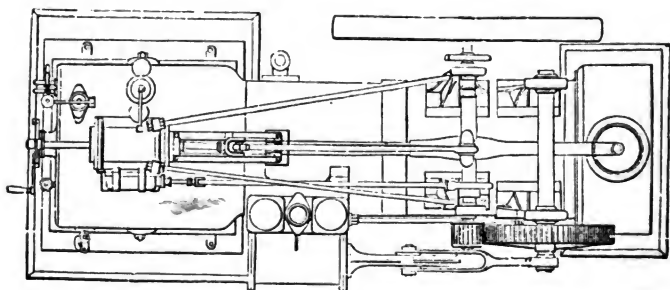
Semi-portable Steam-pump and Boiler. Plan.
